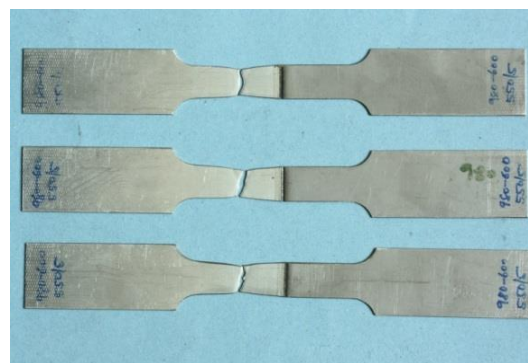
Examples of the TWB specimen with the weld joint in HCT980X – HCT600 combination after tensile test (welding power 550W, rate 5mm/s)
